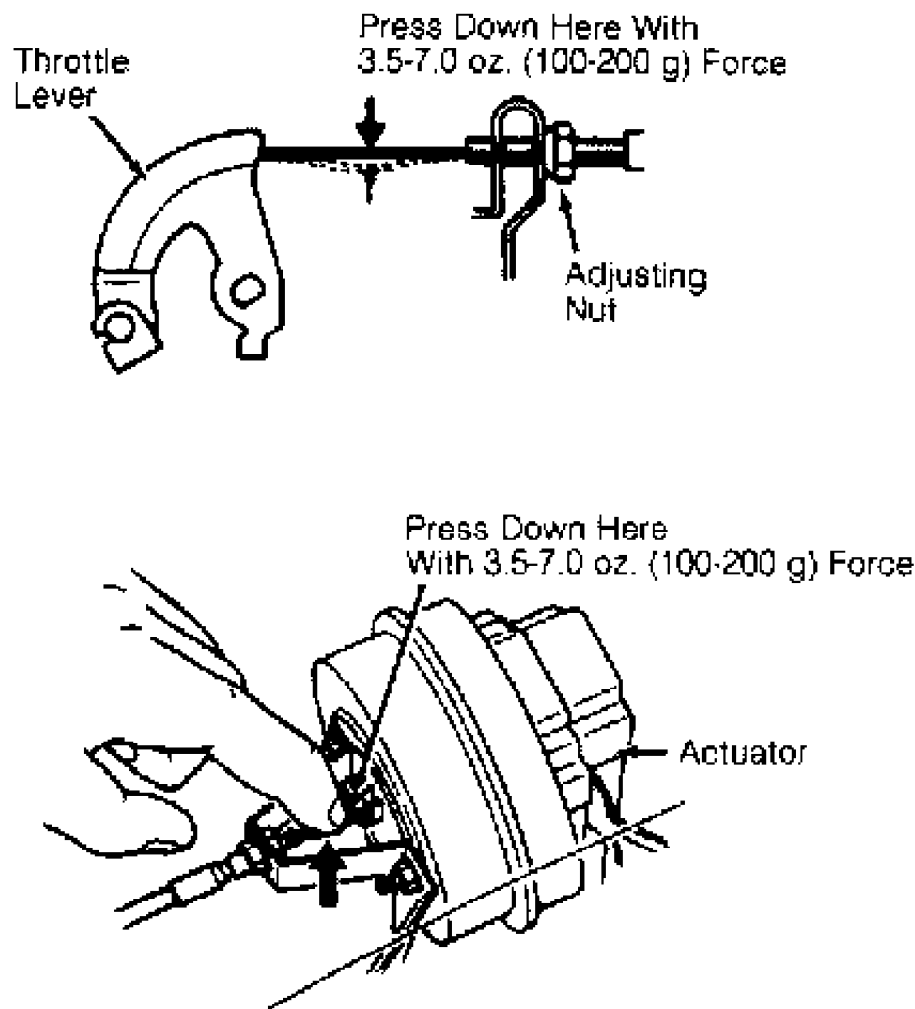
Adjusting Actuator Inner Cable Free Play
